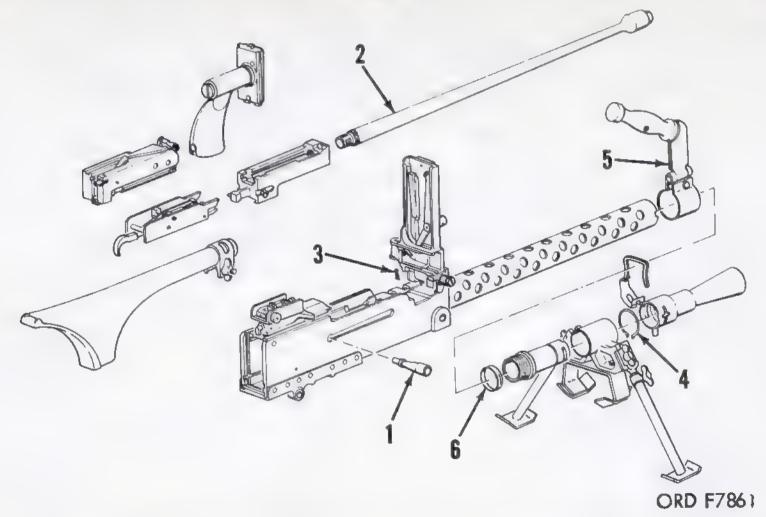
Major groups, assemblies, and component parts for machine gun M1919A6.
